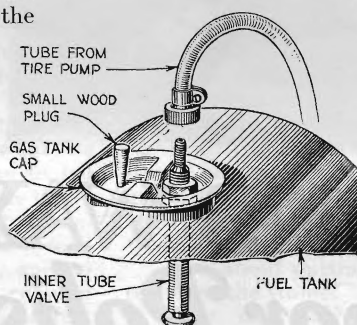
Novel scheme keeps gas flowing to Ford carburetor on a steep hill
